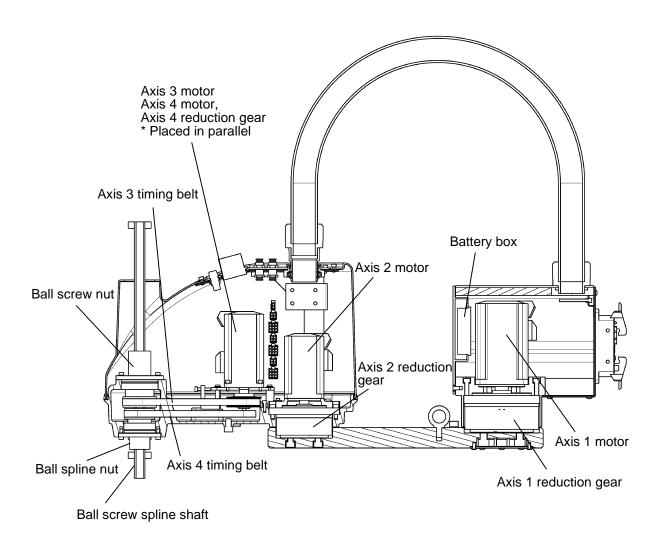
Layout of robot mechanical components (THP550-T)
